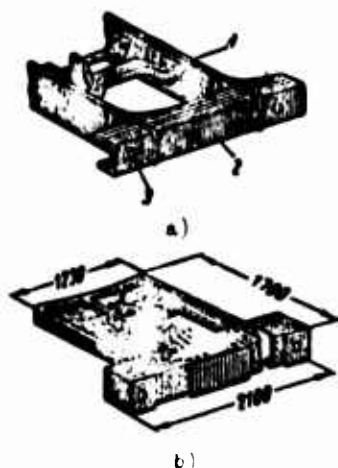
Box: a) welded, united from three parts 1, 2 and 3; b) integral cast.
